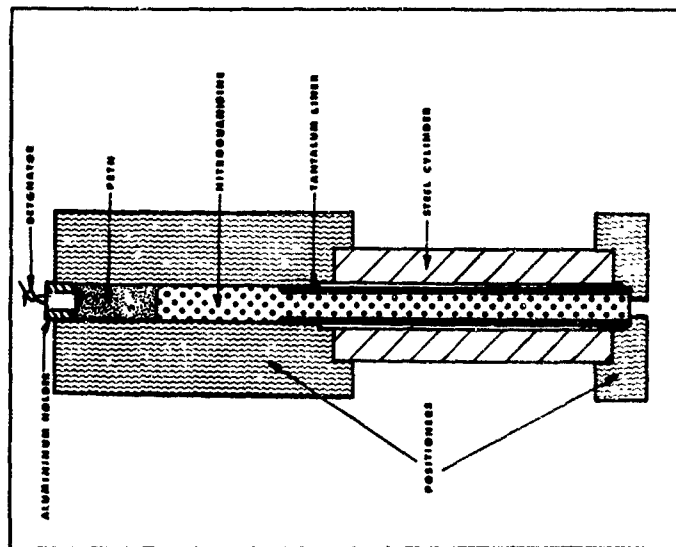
Welding Setup Employing Spacers Outside Liner and Cylinder.
